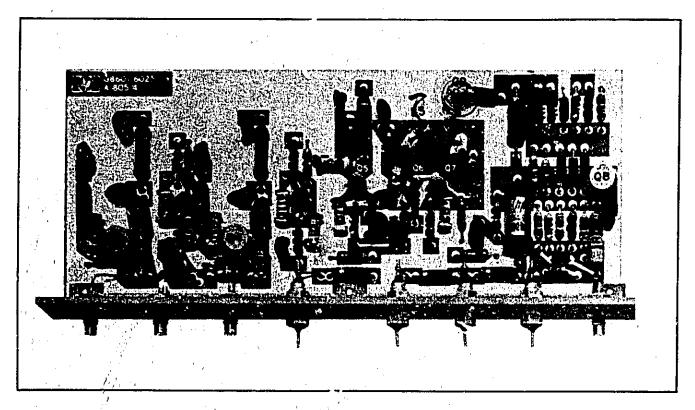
Component Identification, AF VTO Assembly (Part of Change 10)
